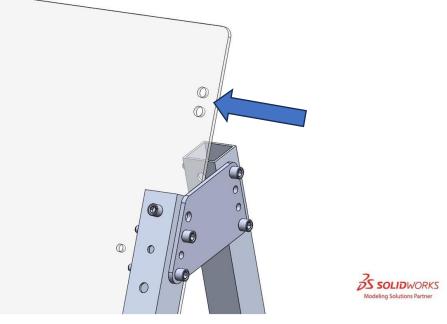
Drill top hole of Diagonal Tube to 17/64 in.
